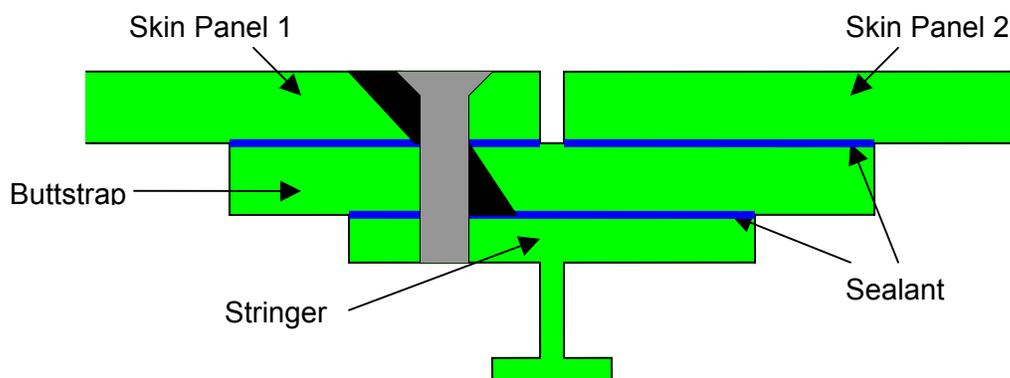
Typical wing skin joint configuration showing sealant and fastener locations. Possible crack locations are shown in black to the left and right of the fastener.
